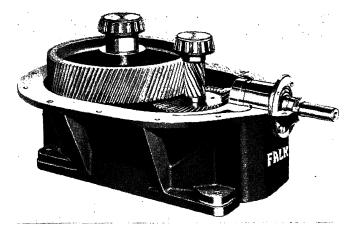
Angle speed reducer. Double-reduction right-angle vertical drive with antifriction bearings. (Falk.)
